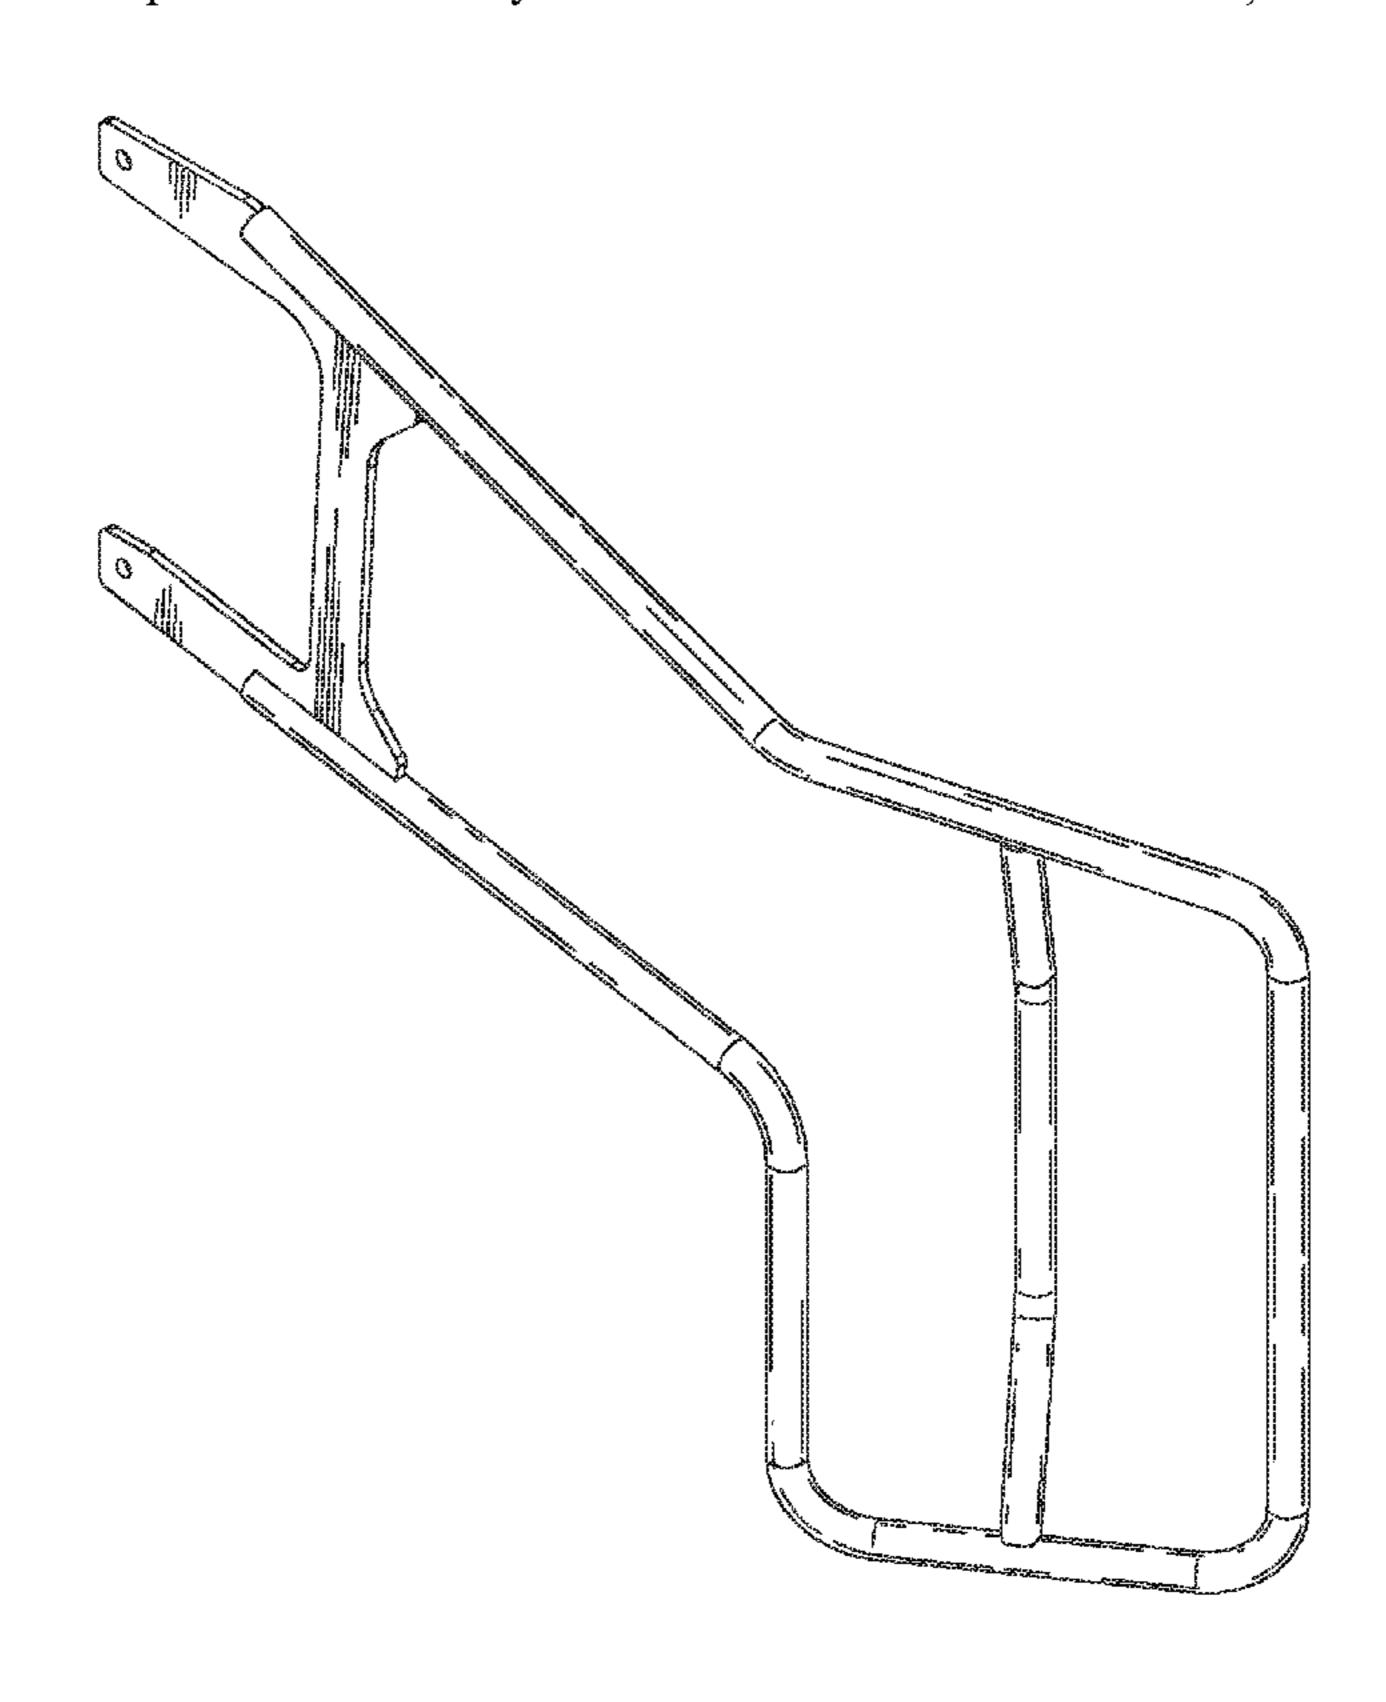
is a top side view of the design for an extension arm for a road construction machine of FIG. 1.
